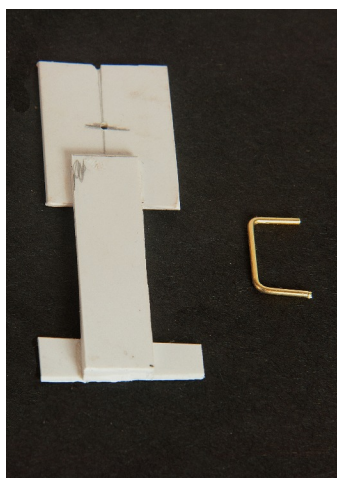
Made from styrene scrap, a quick door handle template was created by filing a notch and drilling a hole. The template has spacers to also make it useful for positioning the door mounting holes.
